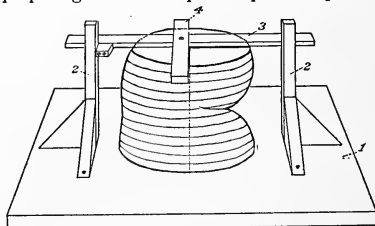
Method of making guide lines; 1, baseboard; 2, perpendicular posts; 3, straight edge; 4, piece at right angles to it.
